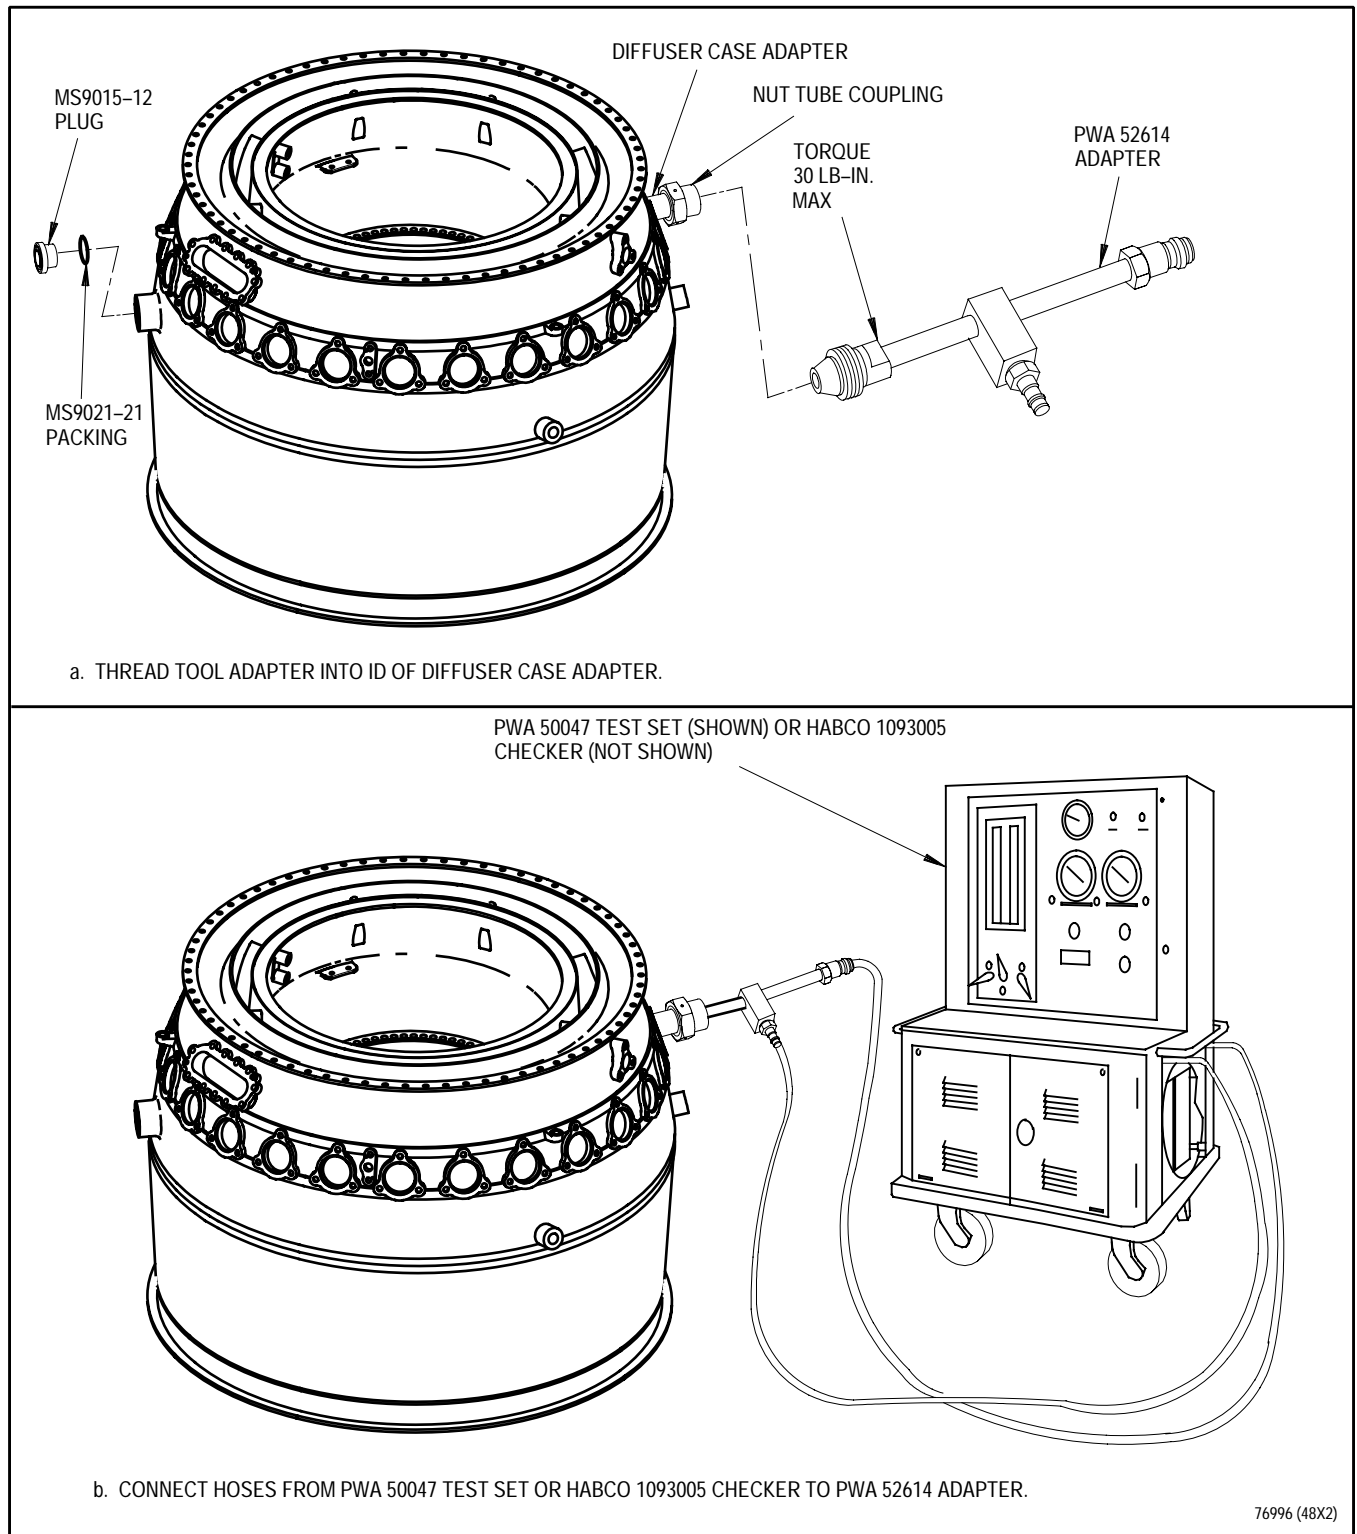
No. 4 Bearing Oil Nozzles - Air Flow Check Tool Installation
